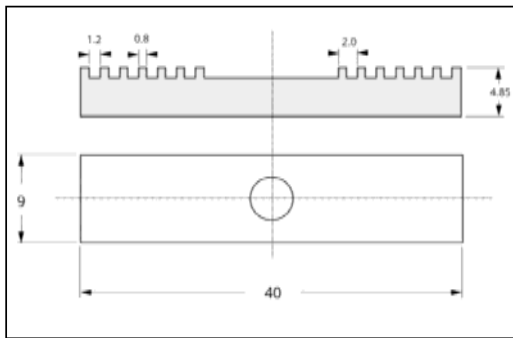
GT-2 timing belt clamp; dimensions in mm.
